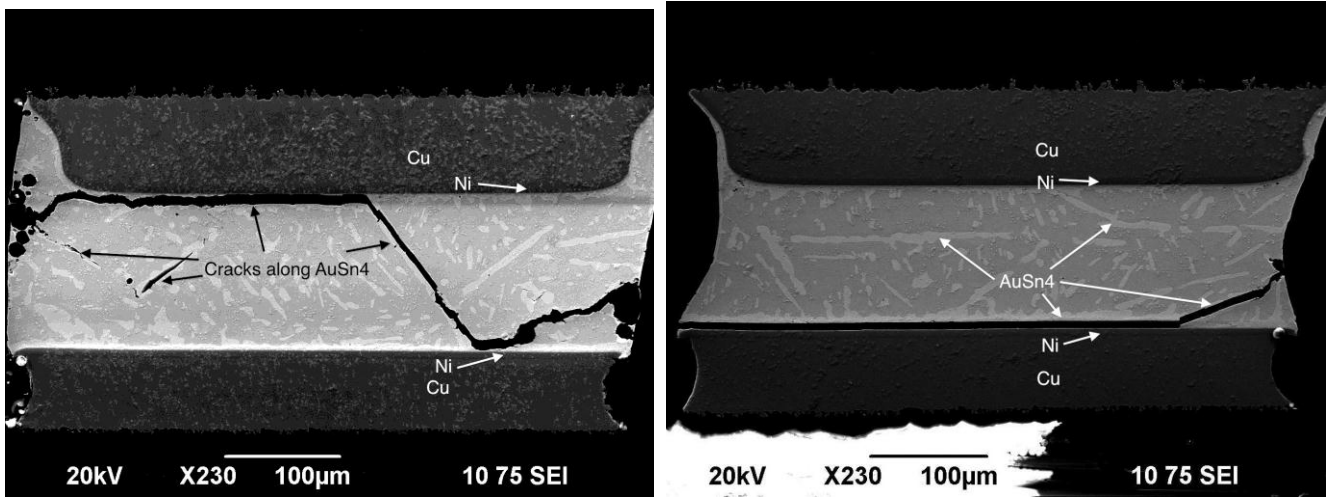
SEM images of solder joints of a TOPS component on a thick Au board, after thermal aging for 30 days
